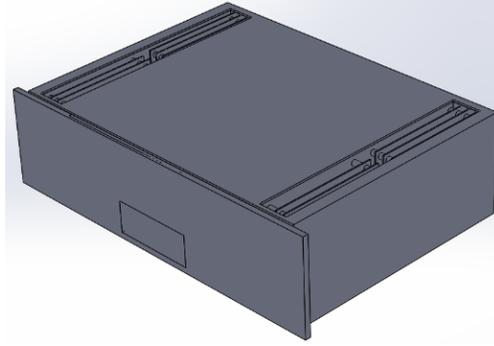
SolidWorks Drawer CAD showing top holes cut away.
